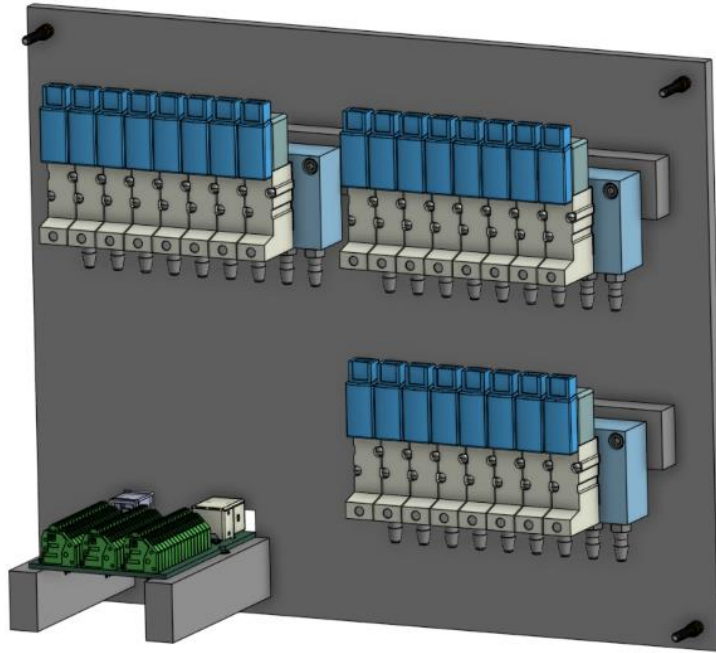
Rear panel with Pneumadyne solenoid manifolds and custom solenoid driver PCB.
